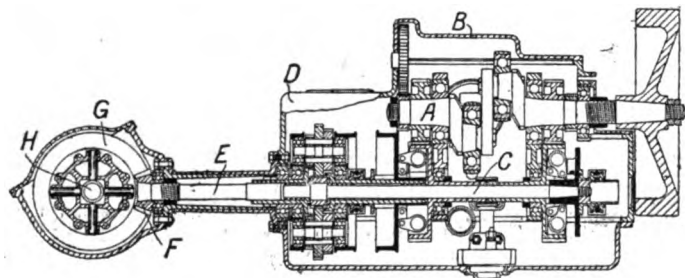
Sectional View of Engine, Change-Speed Gear and Front Axle of Pilgrim Two-Seated Car.
